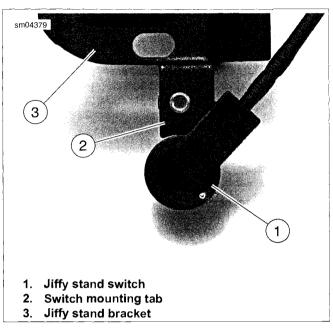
Mounting Jiffy Stand Switch: Top View (Assembly Removed from Vehicle for Clarity)
